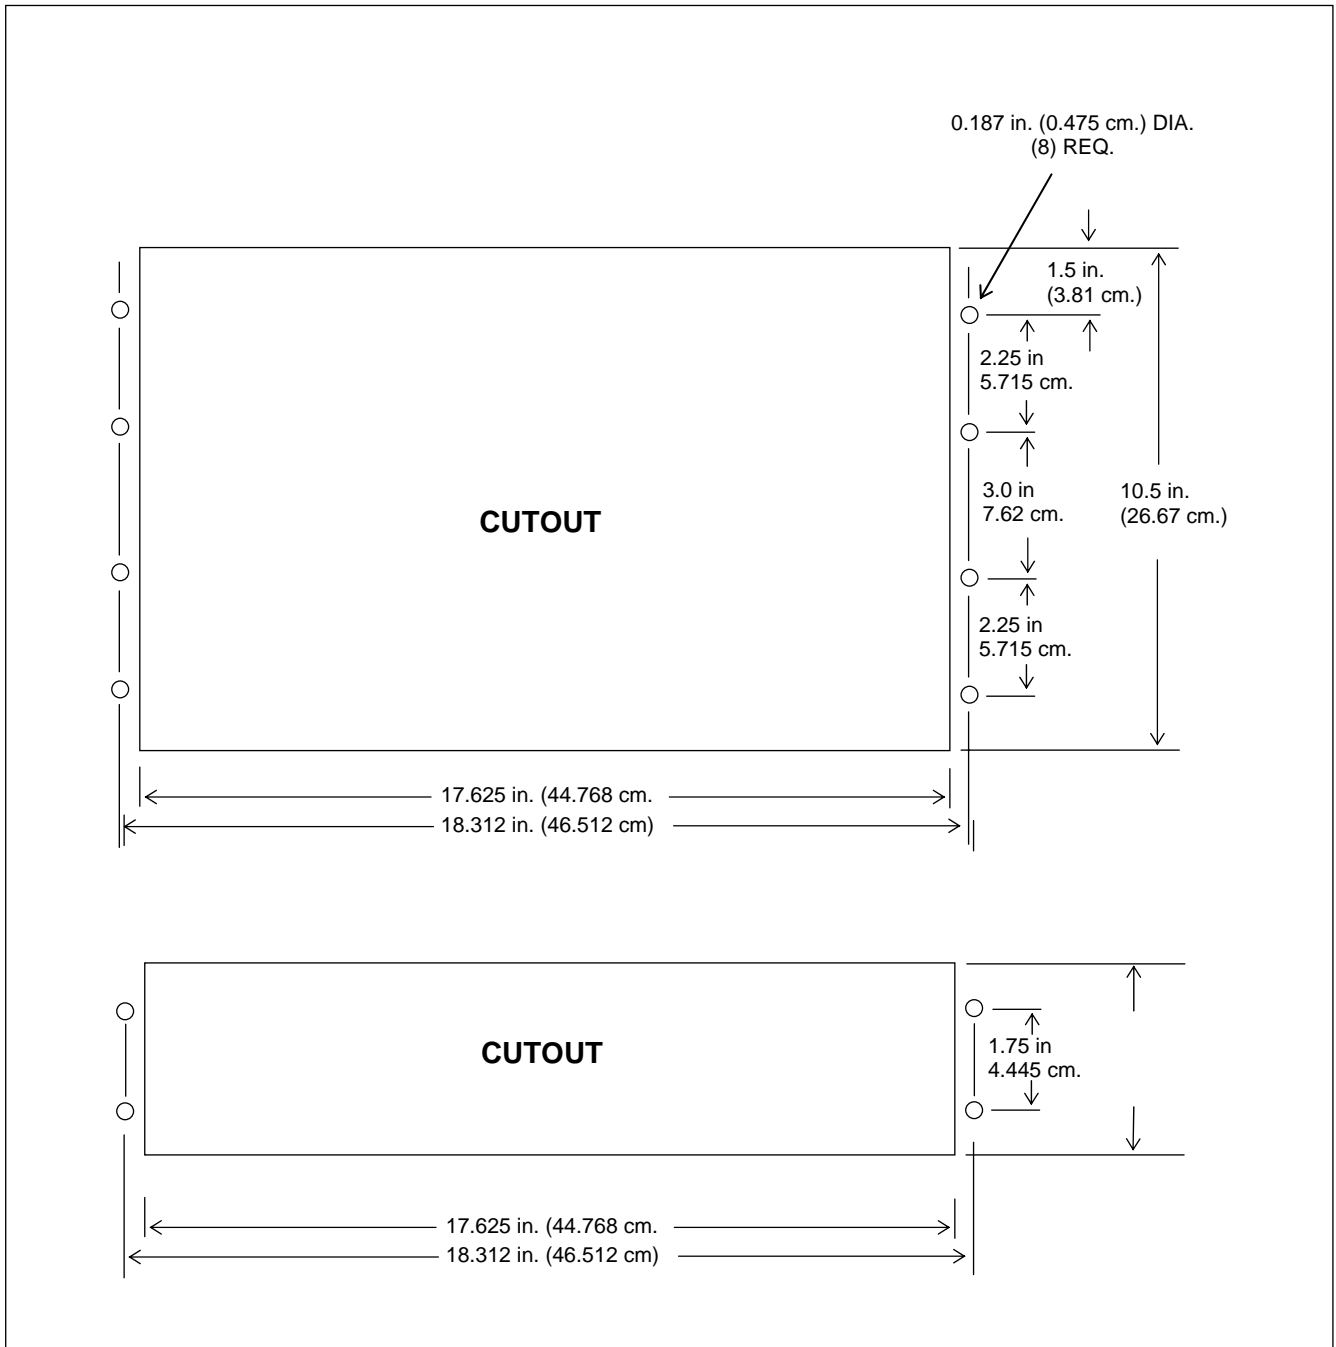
Mounting dimensions for 50W system, RFL 9508D UCC Digital PLC, lower shelf is the multiplexing unit
